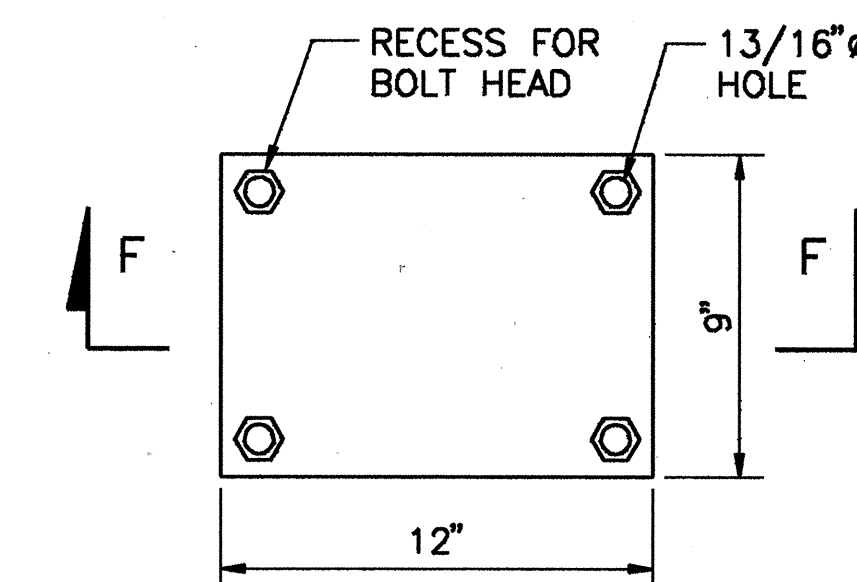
DETAIL D - RECEIVER AND GUIDE SLEEVE BOTTOM
